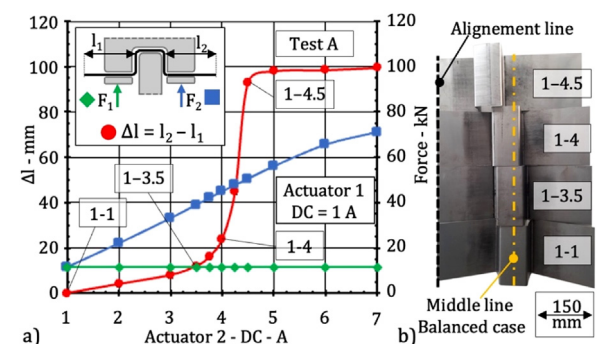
(a) Different drawing in type A tests, and (b) stamped parts.
